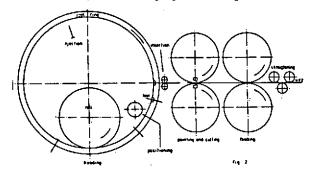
illustrates the principle and figure 3 is an X-ray sketch of the machine. Six pairs of knives mounted on two rings are continously forming the nail points and cutting off the nail wire. Thereupon the blank is placed between two rotating die-rings. As the die-rings are not exactly parallel, the blanks are firmly fixed in bottom position. There a roller forms the nail head. The ready-made nail is subsequently ejected in top position, because the distance between the die-rings is maximum.
